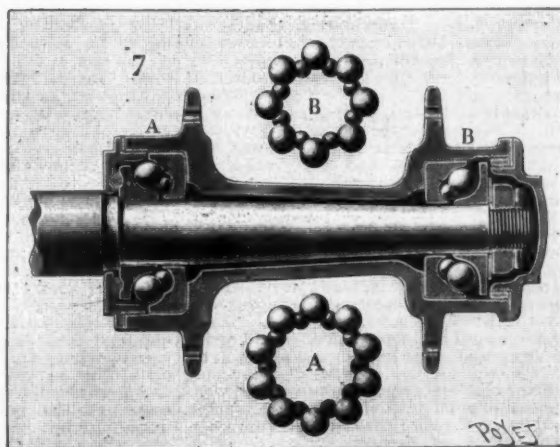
HUB OF A LIGHT CARRIAGE WITH BALL BEARINGS.
